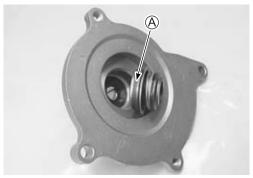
SUZUKI SUPER GREASE "A" or equivalent
